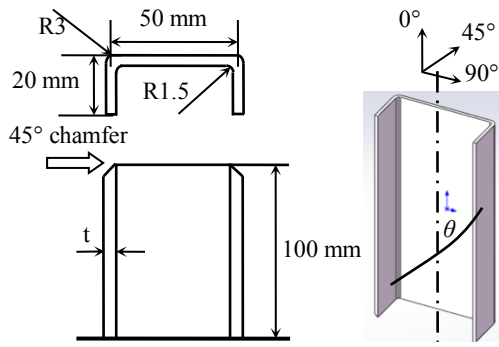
Geometry dimension of composite T700/MTM28 C-channels specimens
